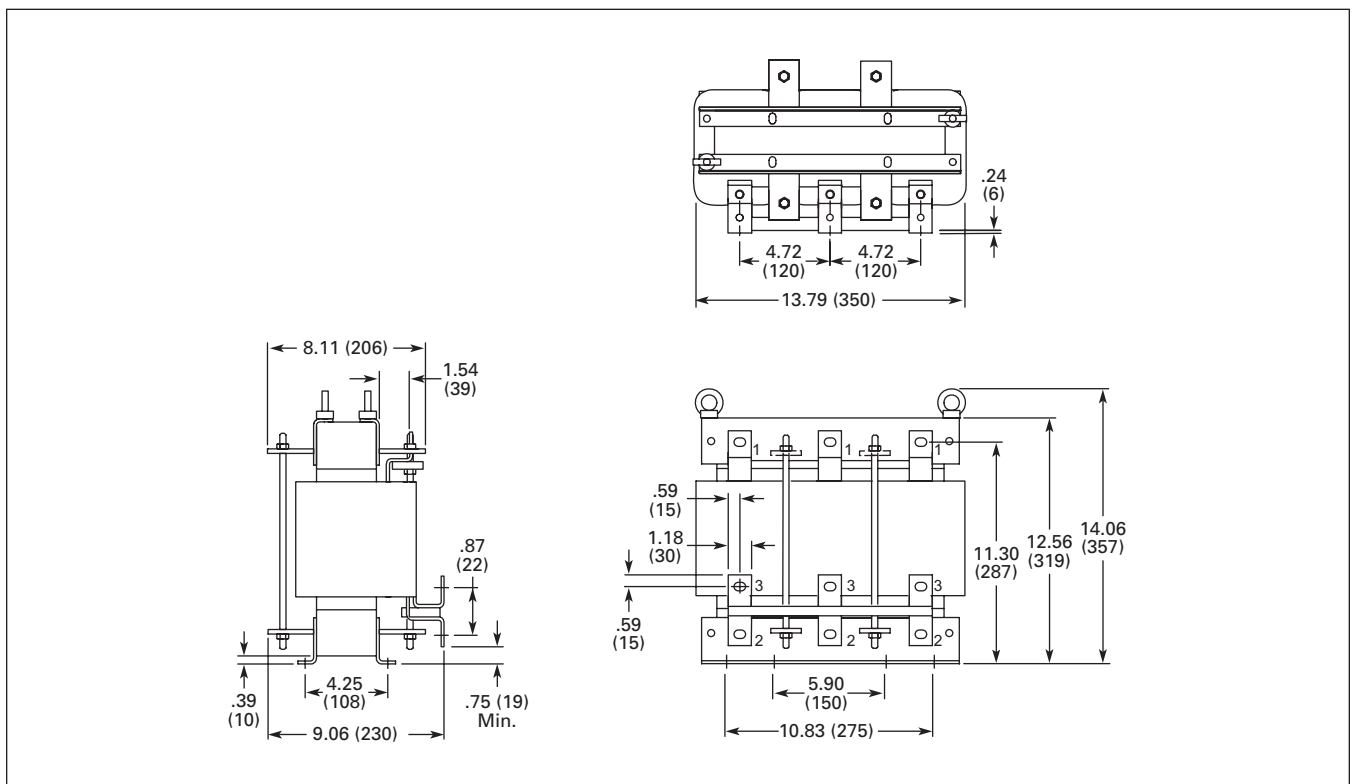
Dimensions of AC Choke CHK0261 in Inches (mm)
